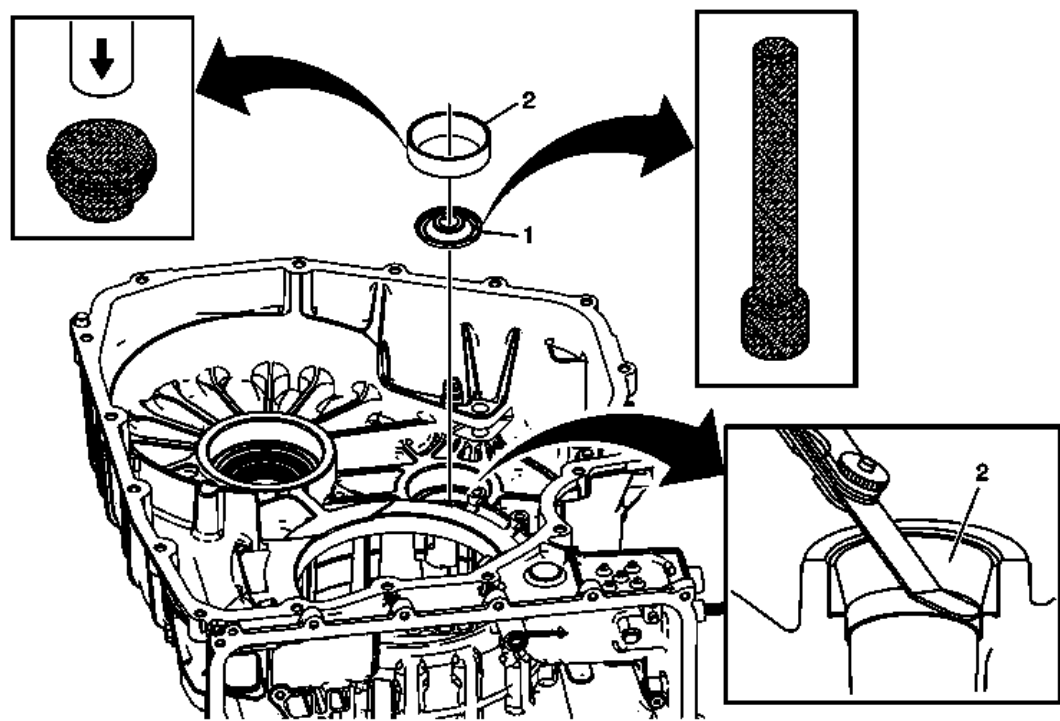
View Of Front Differential Drive Pinion Gear Bearing Cup & Lube Dam
